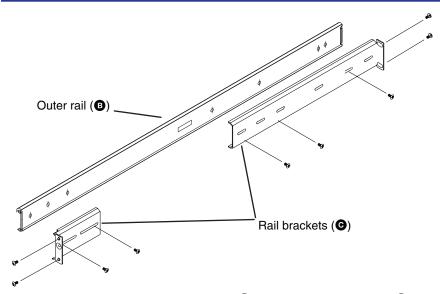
Installing the Outer Rail (B) to the Rail Brackets (O)
